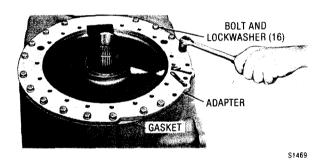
Installing rear housing adapter bolts (TRT-1)
